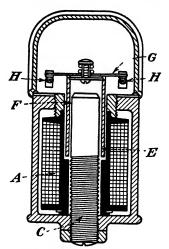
Electric Controller and Manufacturing Company time-current accelerating relaw A, series coil, C, adjusting core, E, aluminum tube, F, core, G, movable contact, H, stationary contacts
